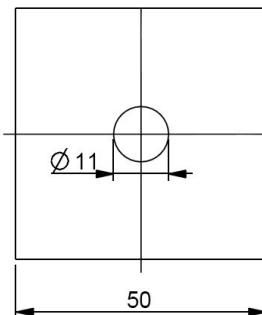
Shear specimen geometry according to ASTM D 732-02
